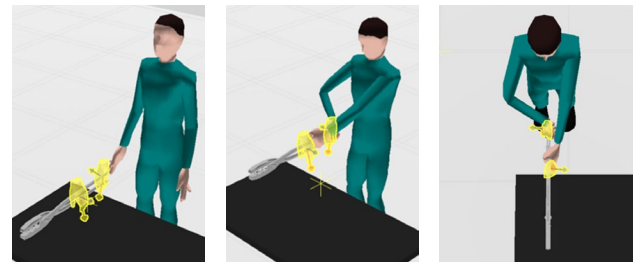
Setting the markers for gripping the forging tongs (left), gripping the forging tongs (middle and right)
